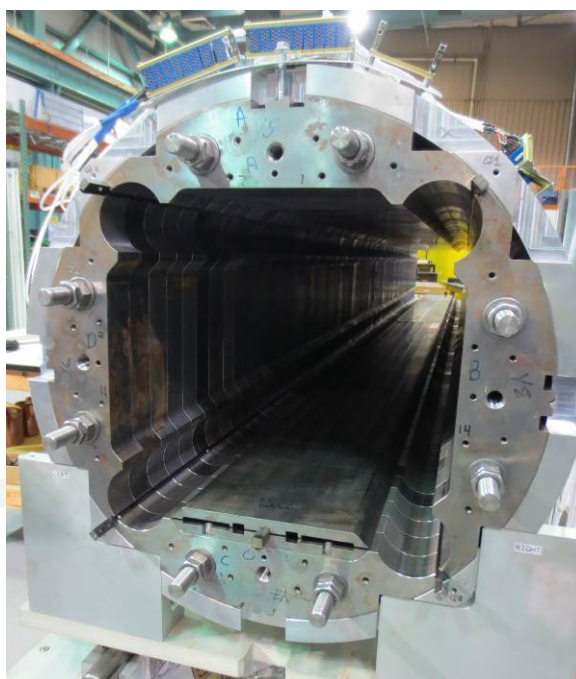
Master Key packages assembled in the bottom of the shell-yoke subassembly
